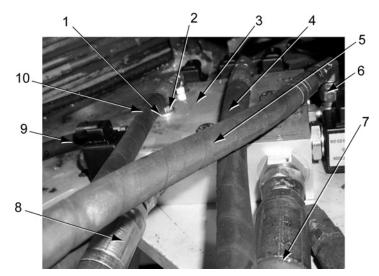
Interconnection of Aft Manifold Assembly on 1" Thick Hull Bottom
